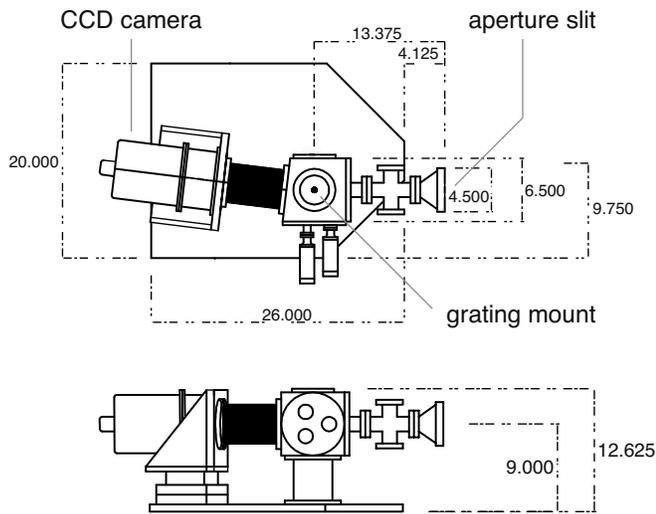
SFFS outline. Top and side views. Dimensions in inches.
